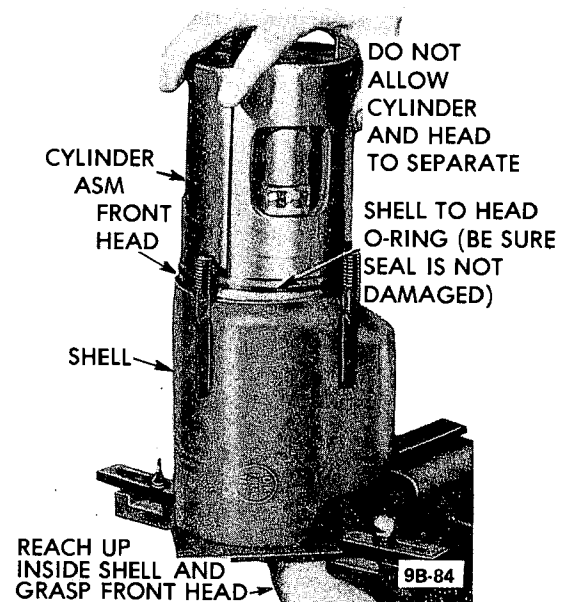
B-111 Installing Front Head and Cylinder Assembly in Shell - 6 Cylinder Compressor
